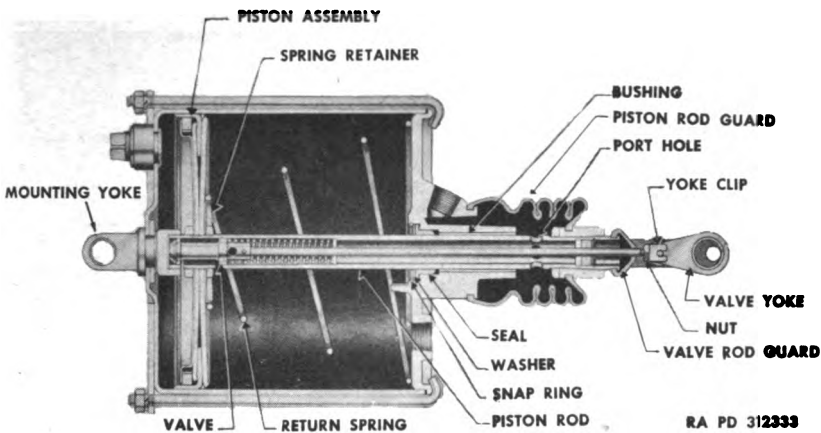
Slide Valve Reactionary Internal Valve Brake Power Unit.
